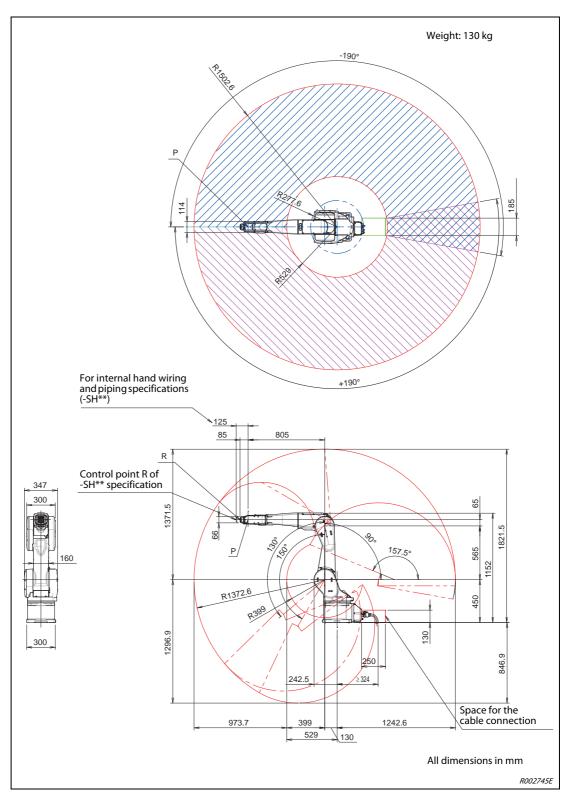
External dimensions and range of motion of robot arm RV-7FRLLM
